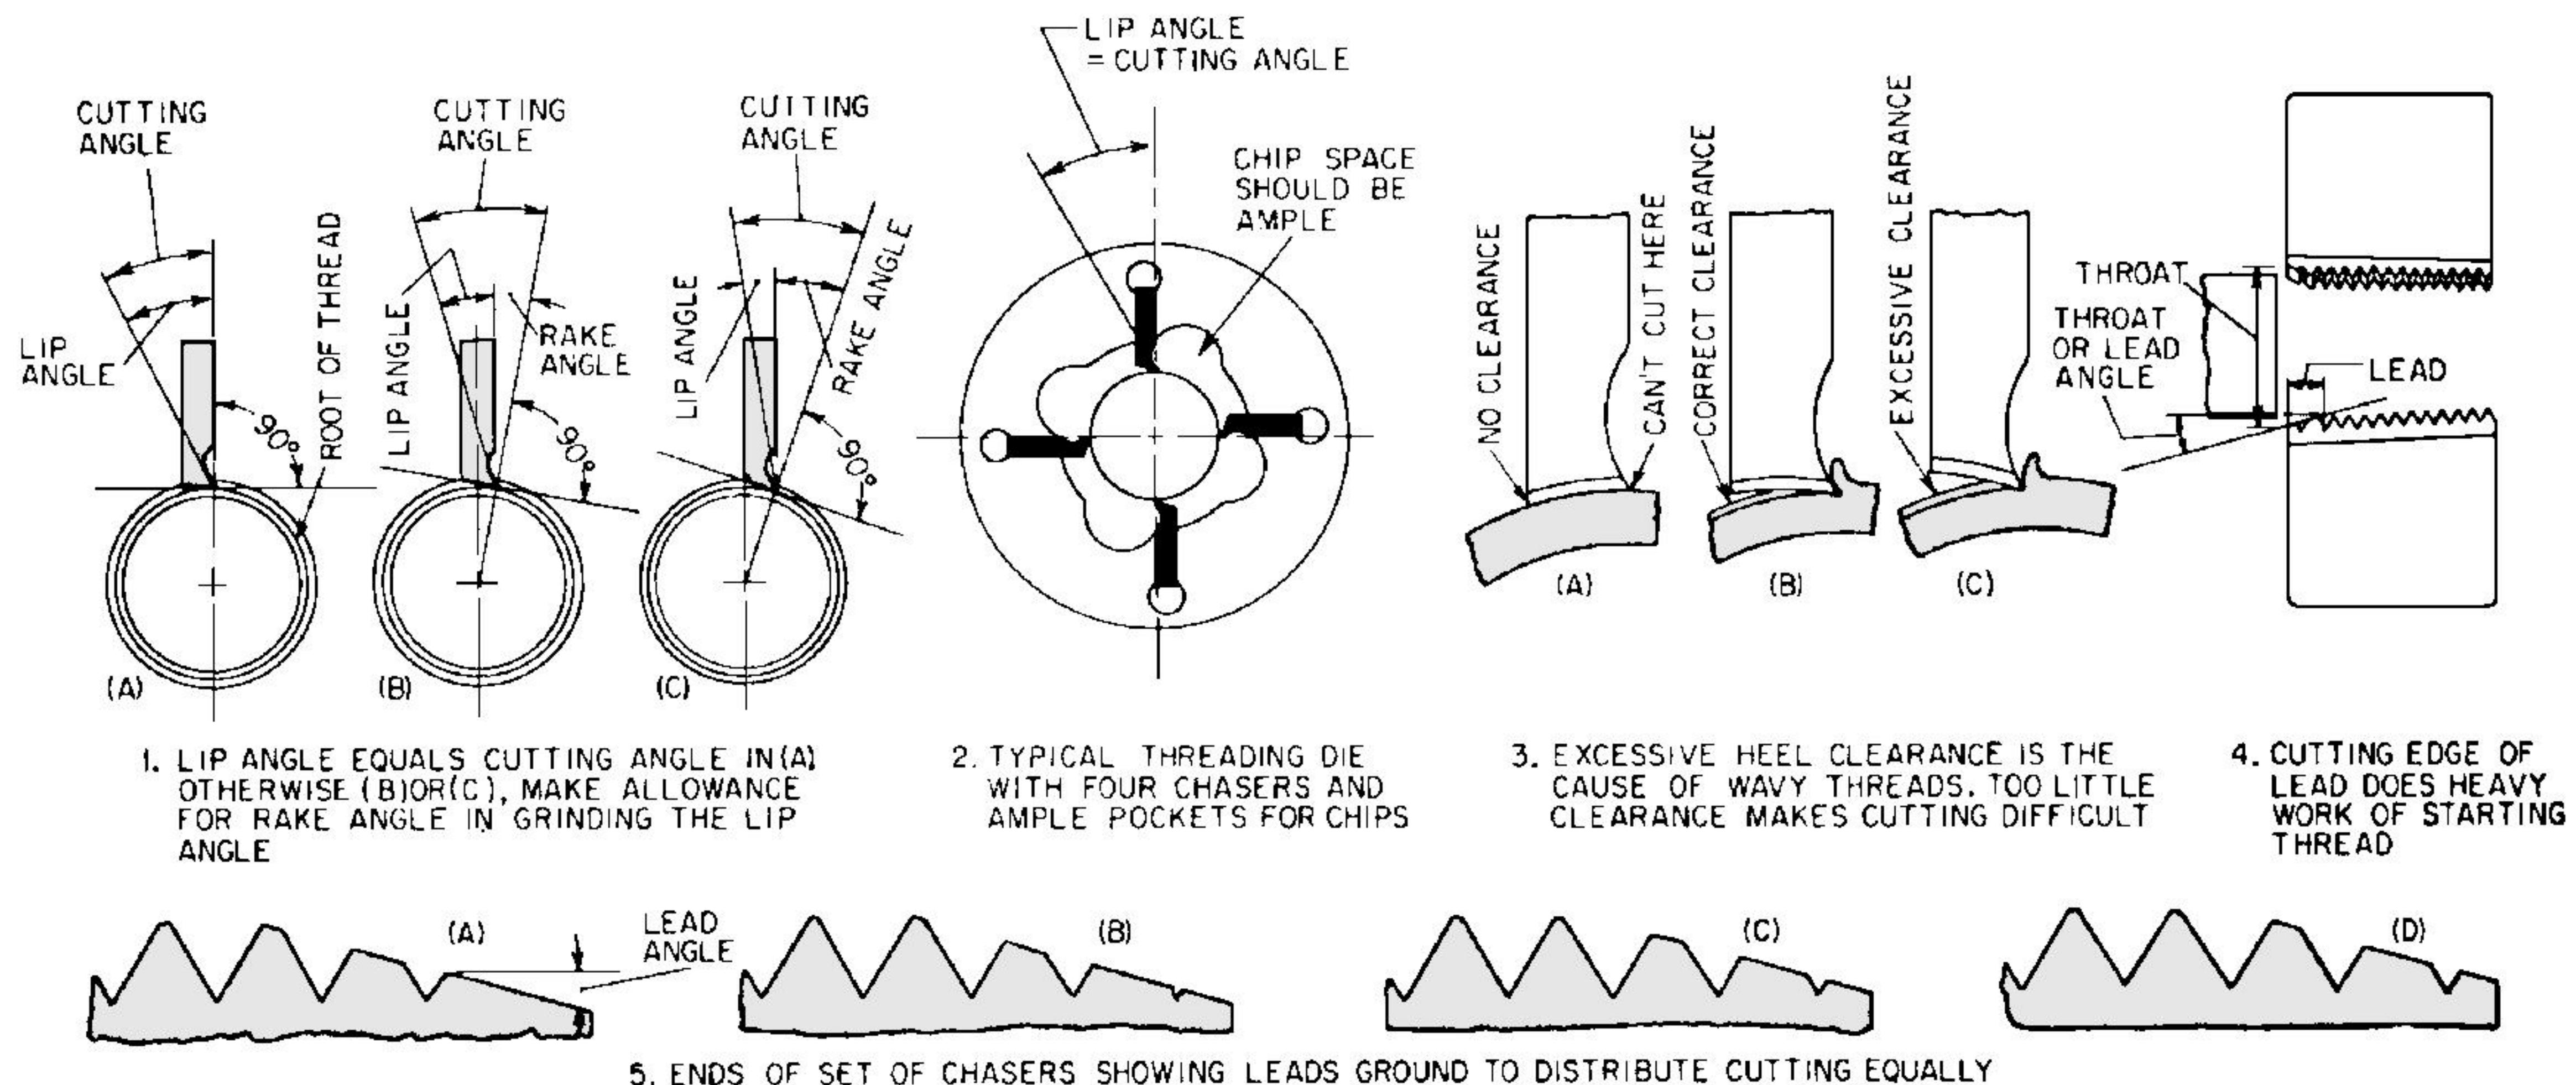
Lip, rake, and cutting angles for thread chasers.
